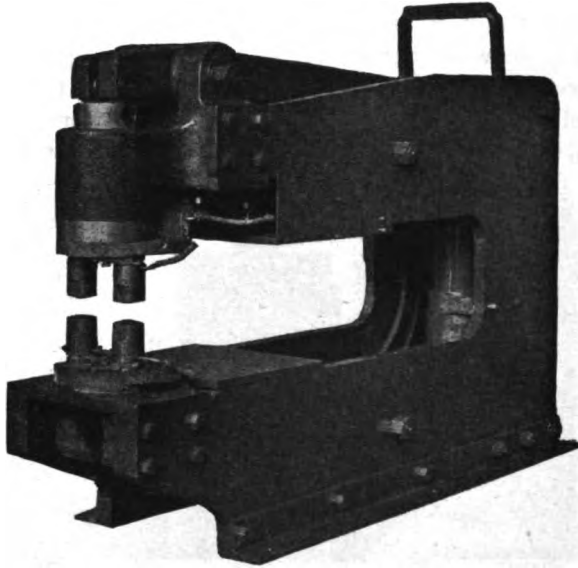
DUPLEX ELECTRIC WELDER—6 FEET REACH. CAPABLE OF WELDING TOGETHER TWO STEEL PLATES $\frac{3}{4}$ INCH THICK IN TWO SPOTS $1\frac{1}{4}$ INCHES IN DIAMETER
